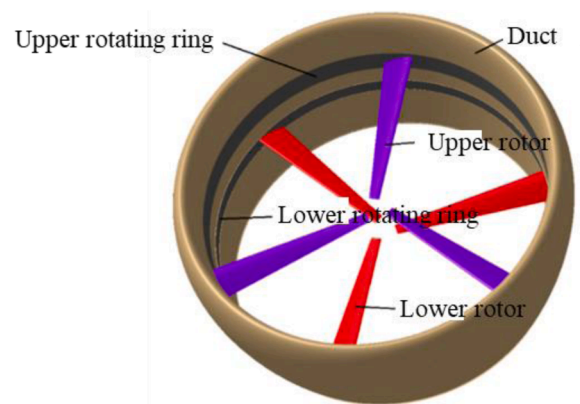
Outline diagram of coaxial dual rotor shaftless ducted rotor.
